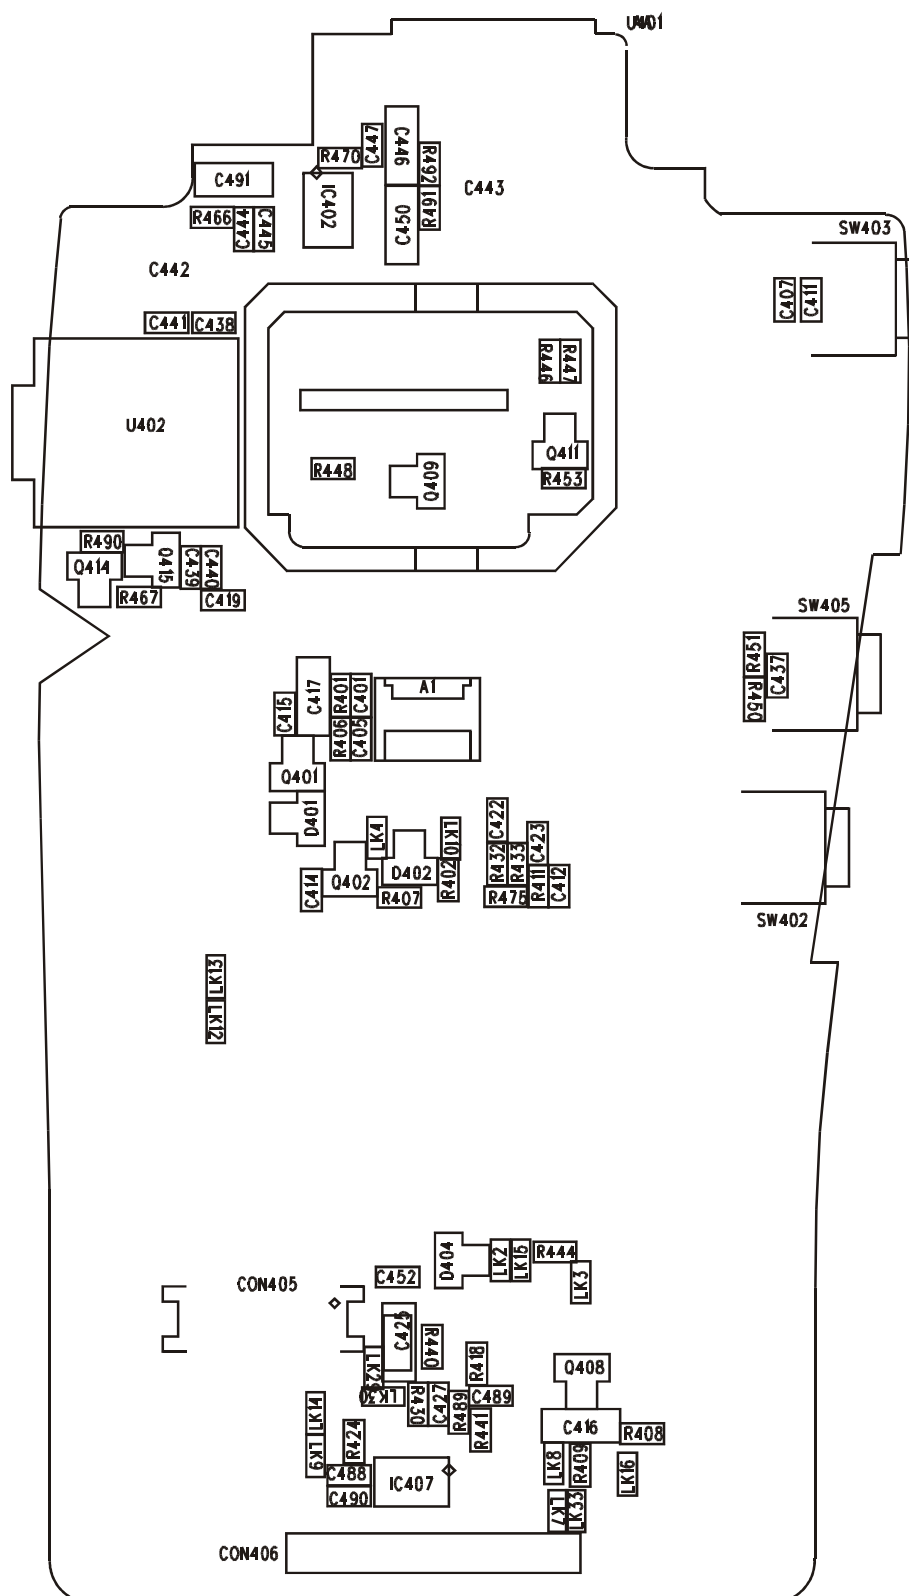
Legend Layout for Bottom Side of Digital PCB
